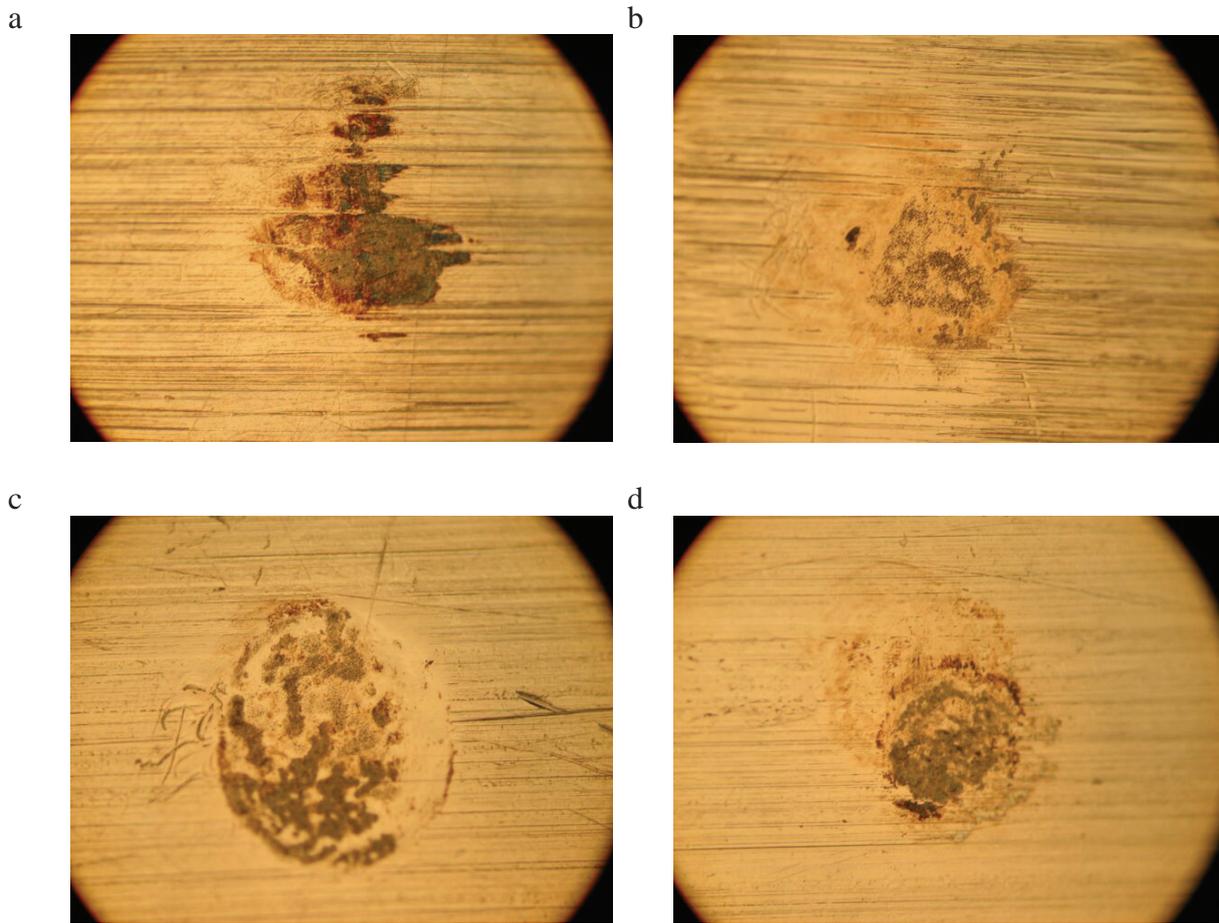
Example photos of samples after conducting contact fatigue test that were subjected to: a) finish lathing, b) grinding, c) burnishing, d) 3 burnish passes
